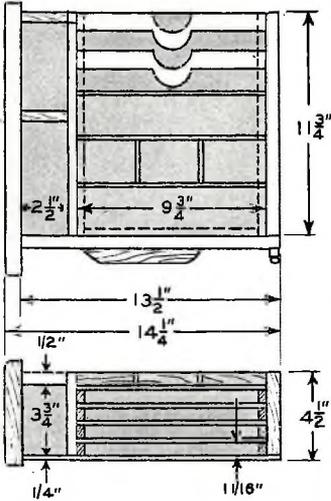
PLAN VIEW & SECTION OF THE STATIONERY DRAWER
